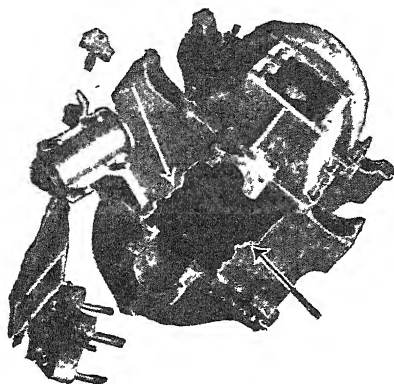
A valuable aluminium gearbox, belonging to another vehicle. The extent of the damage is clearly shown.
